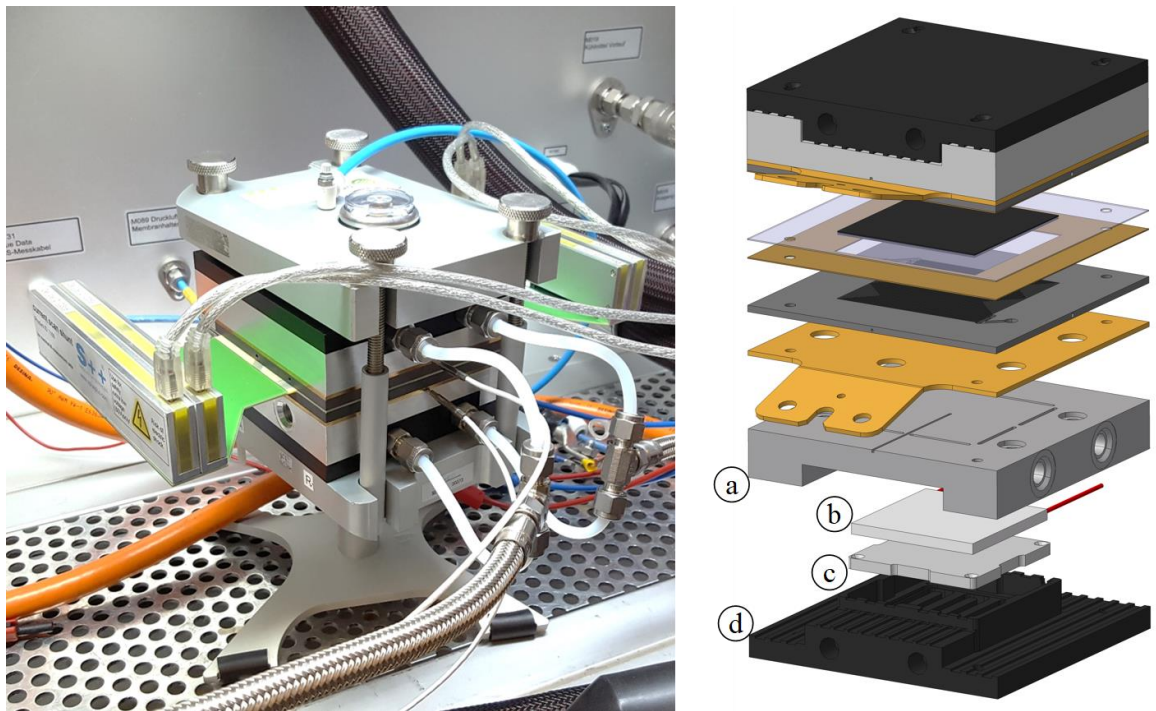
(a) The PET SC TP50 prototype during initial commissioning with the CAD model. The anode side is shown in exploded view with the thermal transfer plate (TTP), (b) the Peltier element, (c) the waste heat transfer plate (WHTP) and (d) the polyoxymethylene plastic (POM) base plate (BP).
